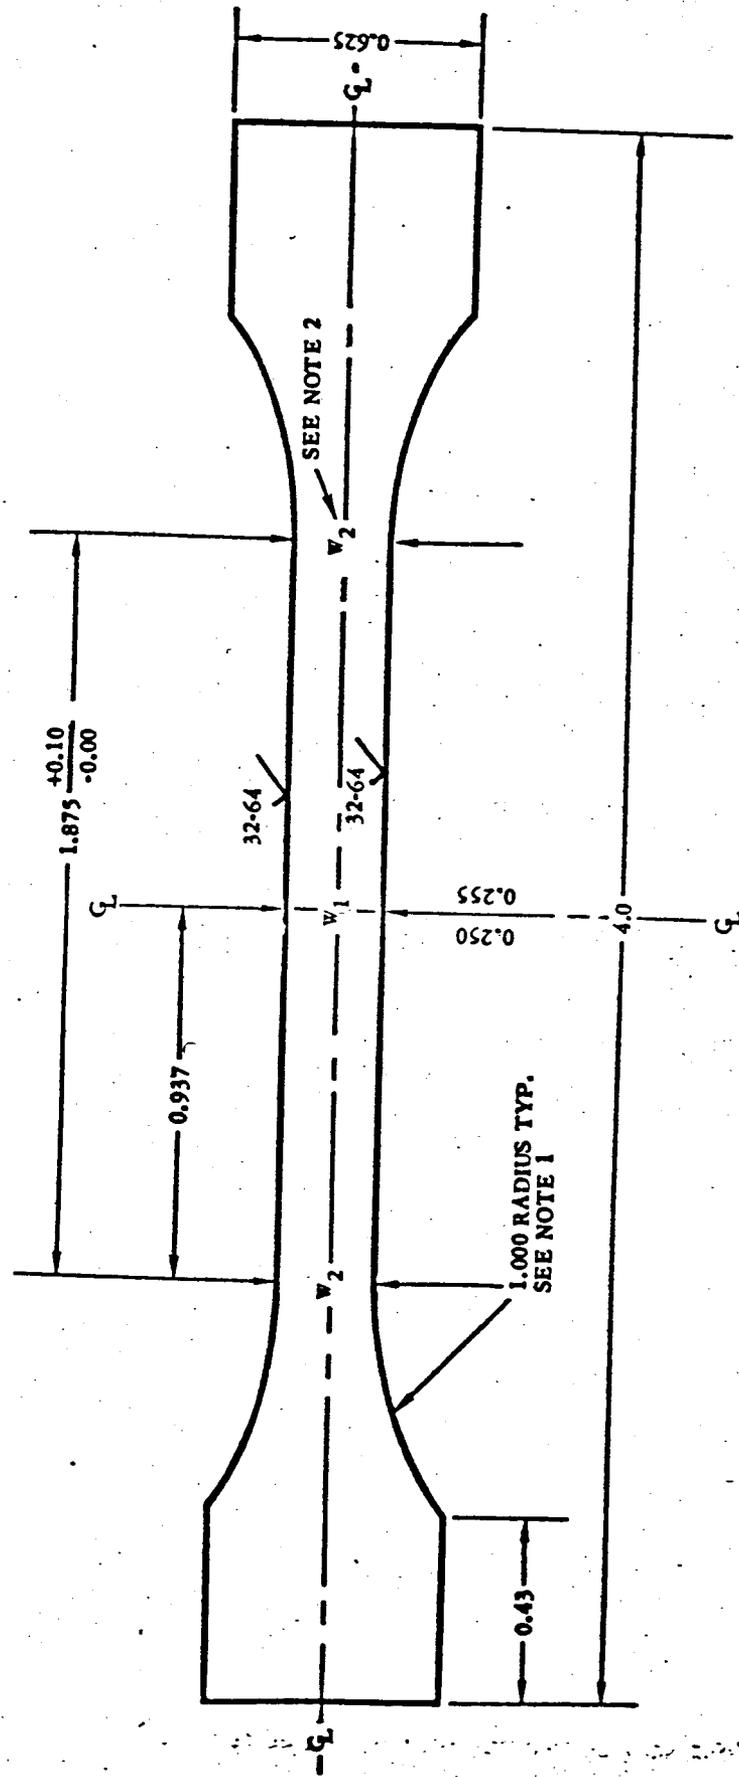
Test coupon for Instron vacuum tensile test of sheet material.
